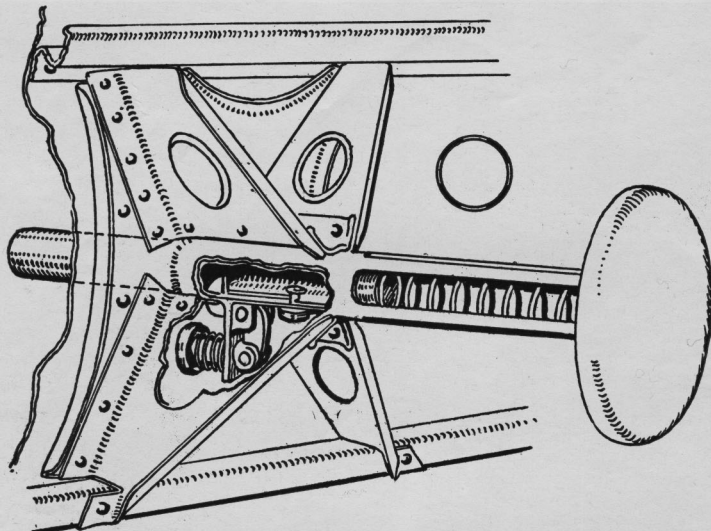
A cutaway view showing the construction of the upper handhold support bracket and mushroom head for protecting the fuselage flotation gear. The tube handle is slotted and pushed out by a small spring in the skeleton tube, a section of which is shown above the tube. A button, flush with the fuselage skin, releases a latch which holds the handle tube inside the fuselage. A rivet projects in the slot to prevent the handle from flying off when released.
